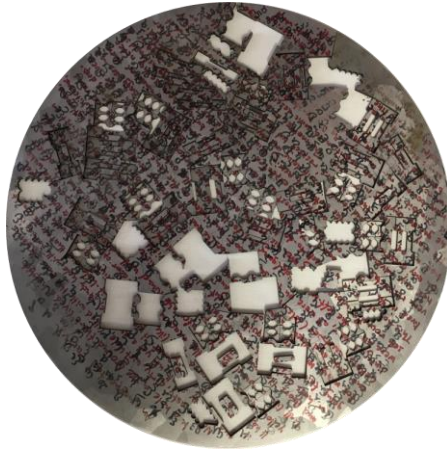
Large grain niobium disk after cutting with markings to identify specimens’ original location.
